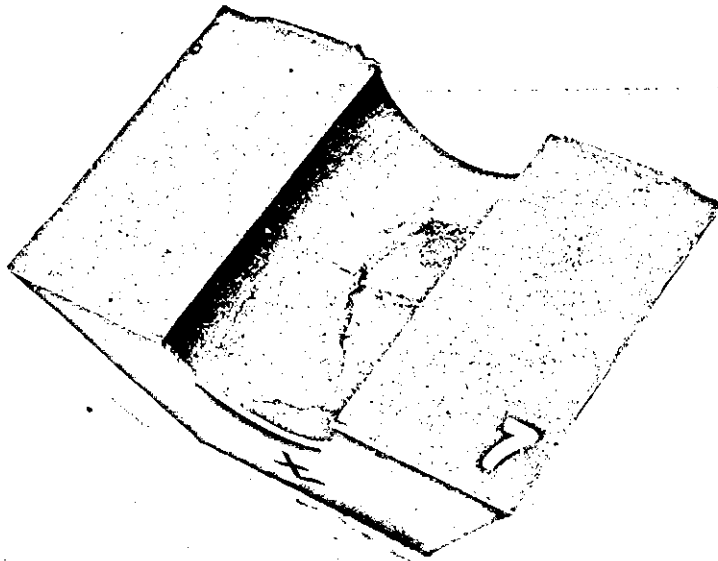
View of the shot-blasted surface finish of the cast iron casting shown above.
